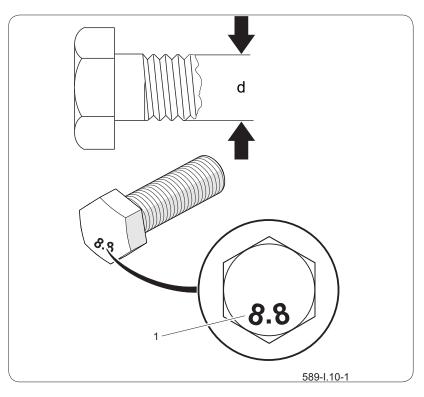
Screw with metric thread(1) strength class,(d) thread diameter
